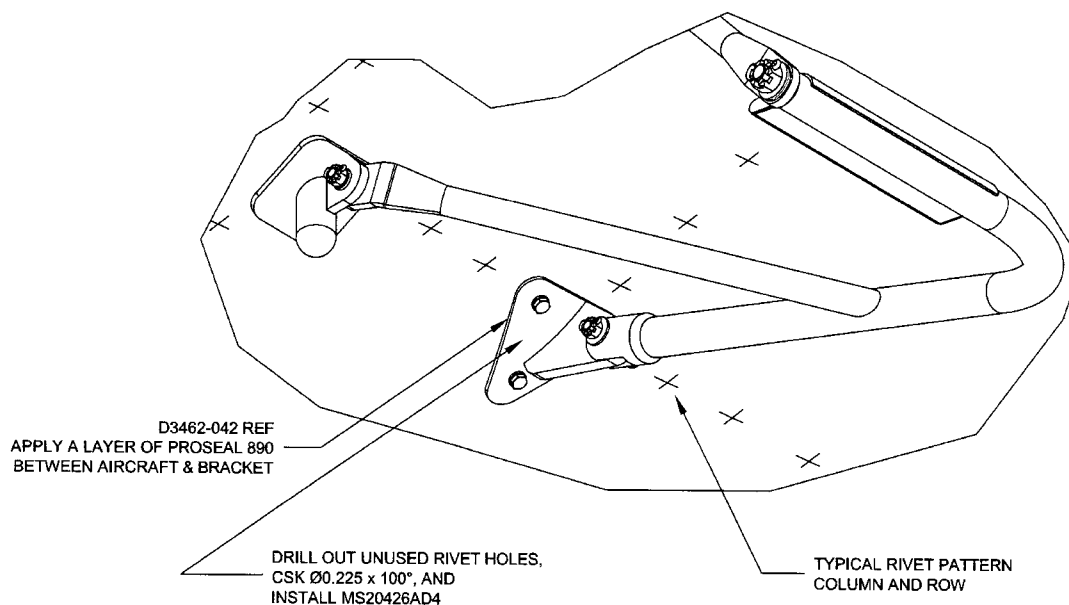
Detail View D3462-042 Bracket Assembly (-032 Installation, Shown) D3462-041, (-031 Installation Opposite)
